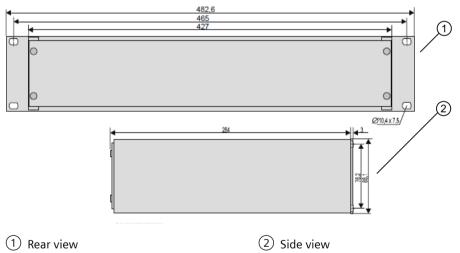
19-inch control unit 4 to 20 mA, dimensions in mm
